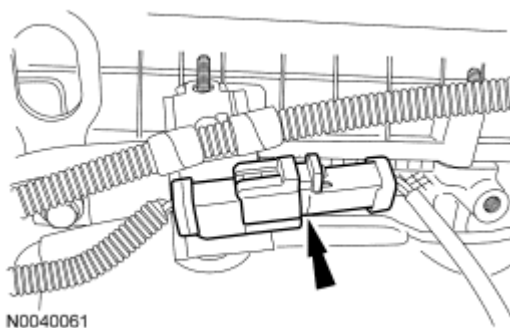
Locating Heated Oxygen Sensor (HO2S) Electrical Connector
